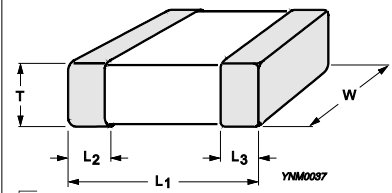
Surface mounted multilayer ceramic capacitor dimension
